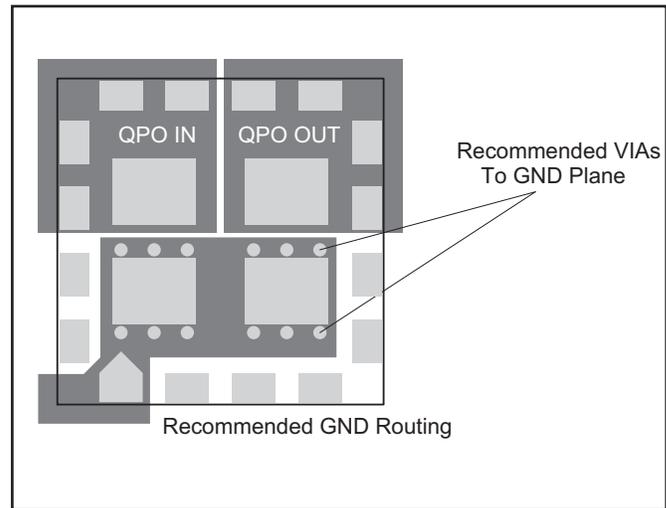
Recommended copper pattern for LGA mounting showing QPO pads and minimum copper landing. Pattern should be on 2 oz. copper with vias, placed outside of device pad solder mask openings, used to connect to internal layers (if required).
